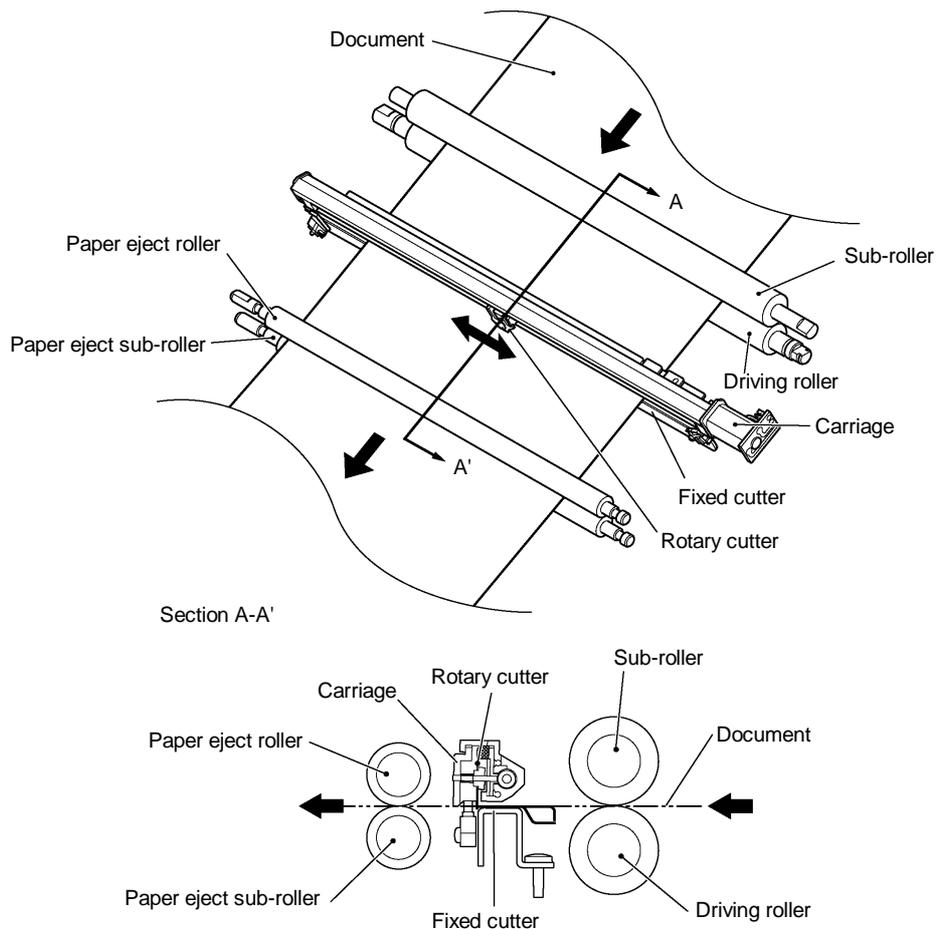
Cutting Leading and Trailing Edges (X-cutter Mechanism)
